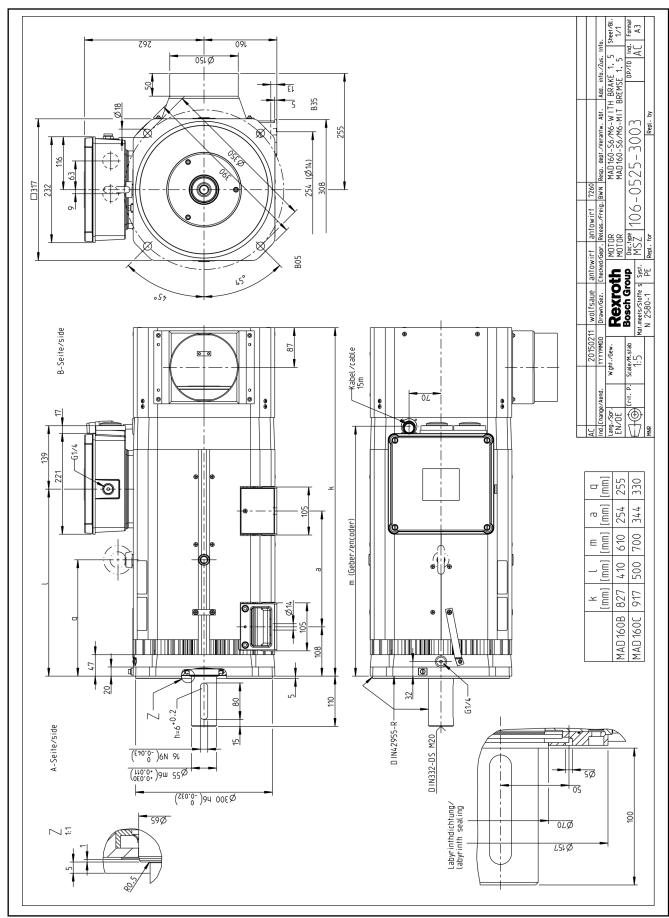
MAD160 with encoder M6/S6, brake 1/5
